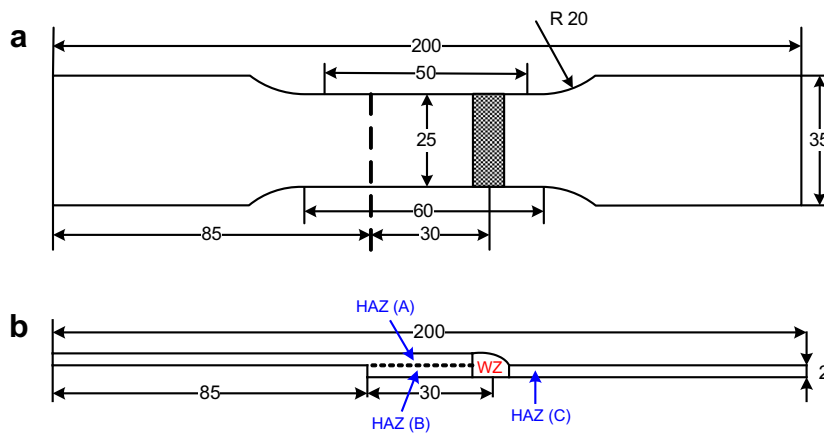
Dimensions of the transverse welded specimen for uni-axial tension tests (in mm): (a) top view and (b) cross-section view.
